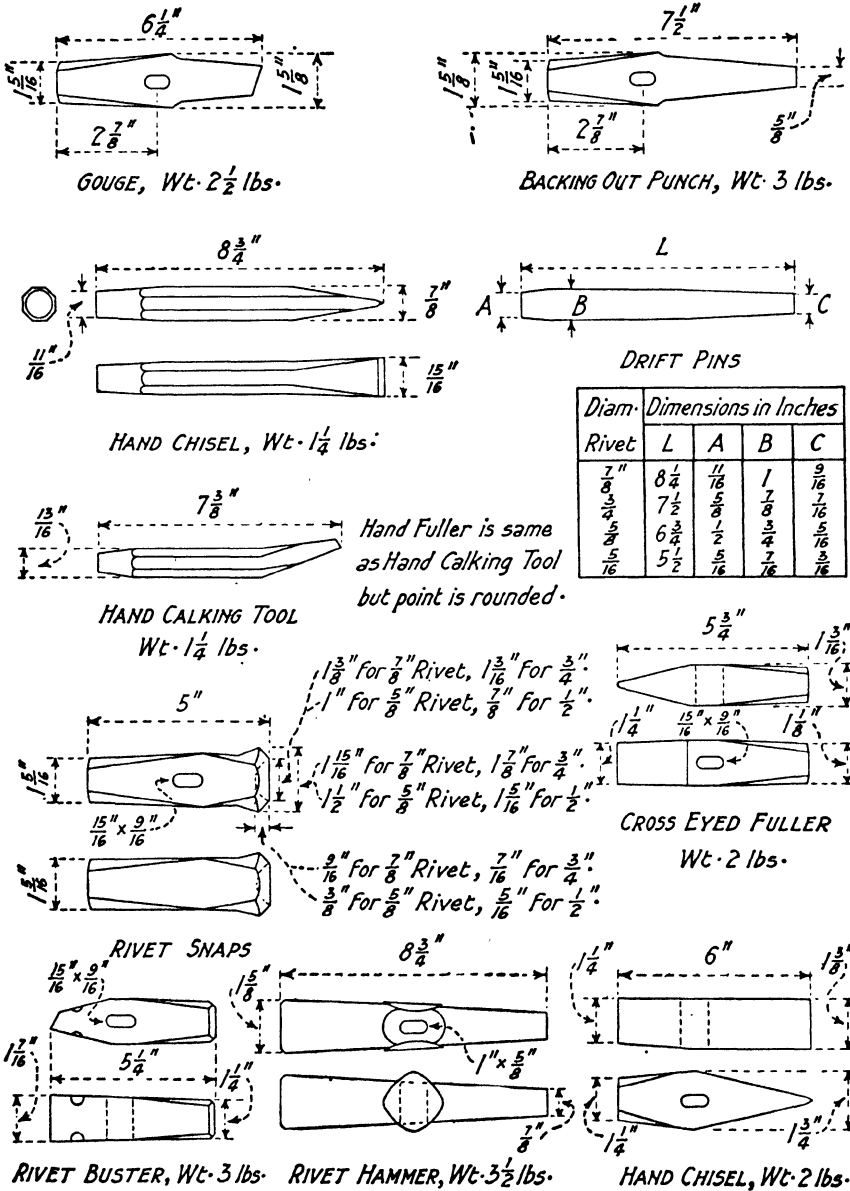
TOOLS FOR ERECTION OF ELEVATED TANKS. CHICAGO BRIDGE & IRON COMPANY.
